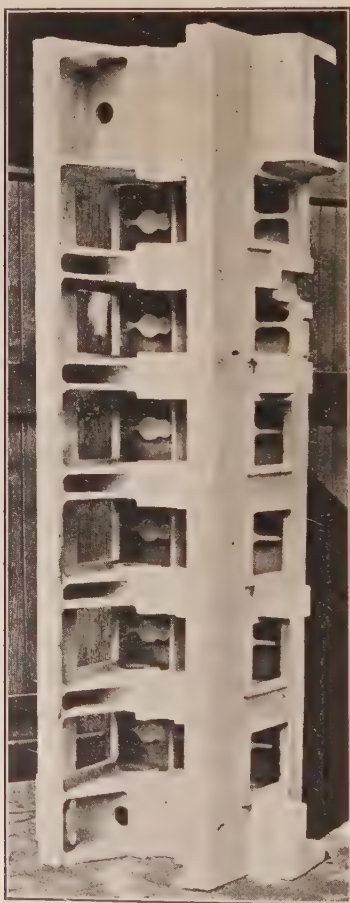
HEAT-TREATED ALUMINUM ALLOY CASTING. AUTOMOBILE CRANK CASE
